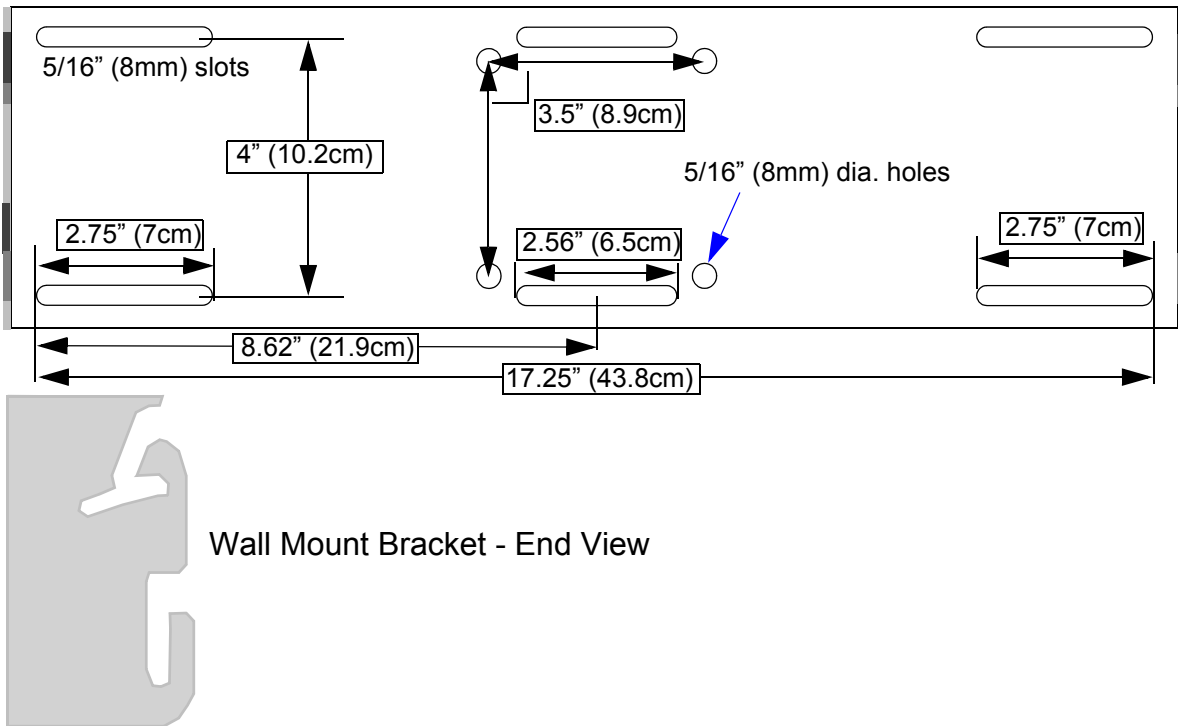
Identifying and Attaching the Supplied Wall Mount Parts
